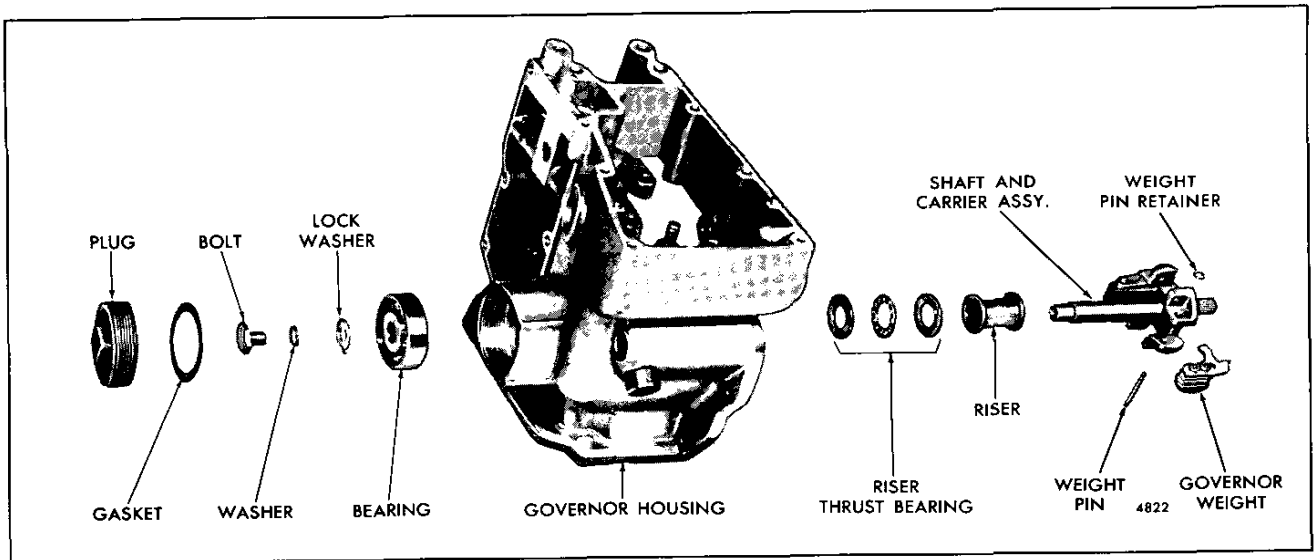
Governor Housing and Weight Details and Relative Location of Parts
